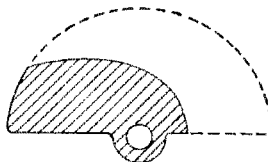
SHAPE OF THE TRIMMED ROTOR PLATES
